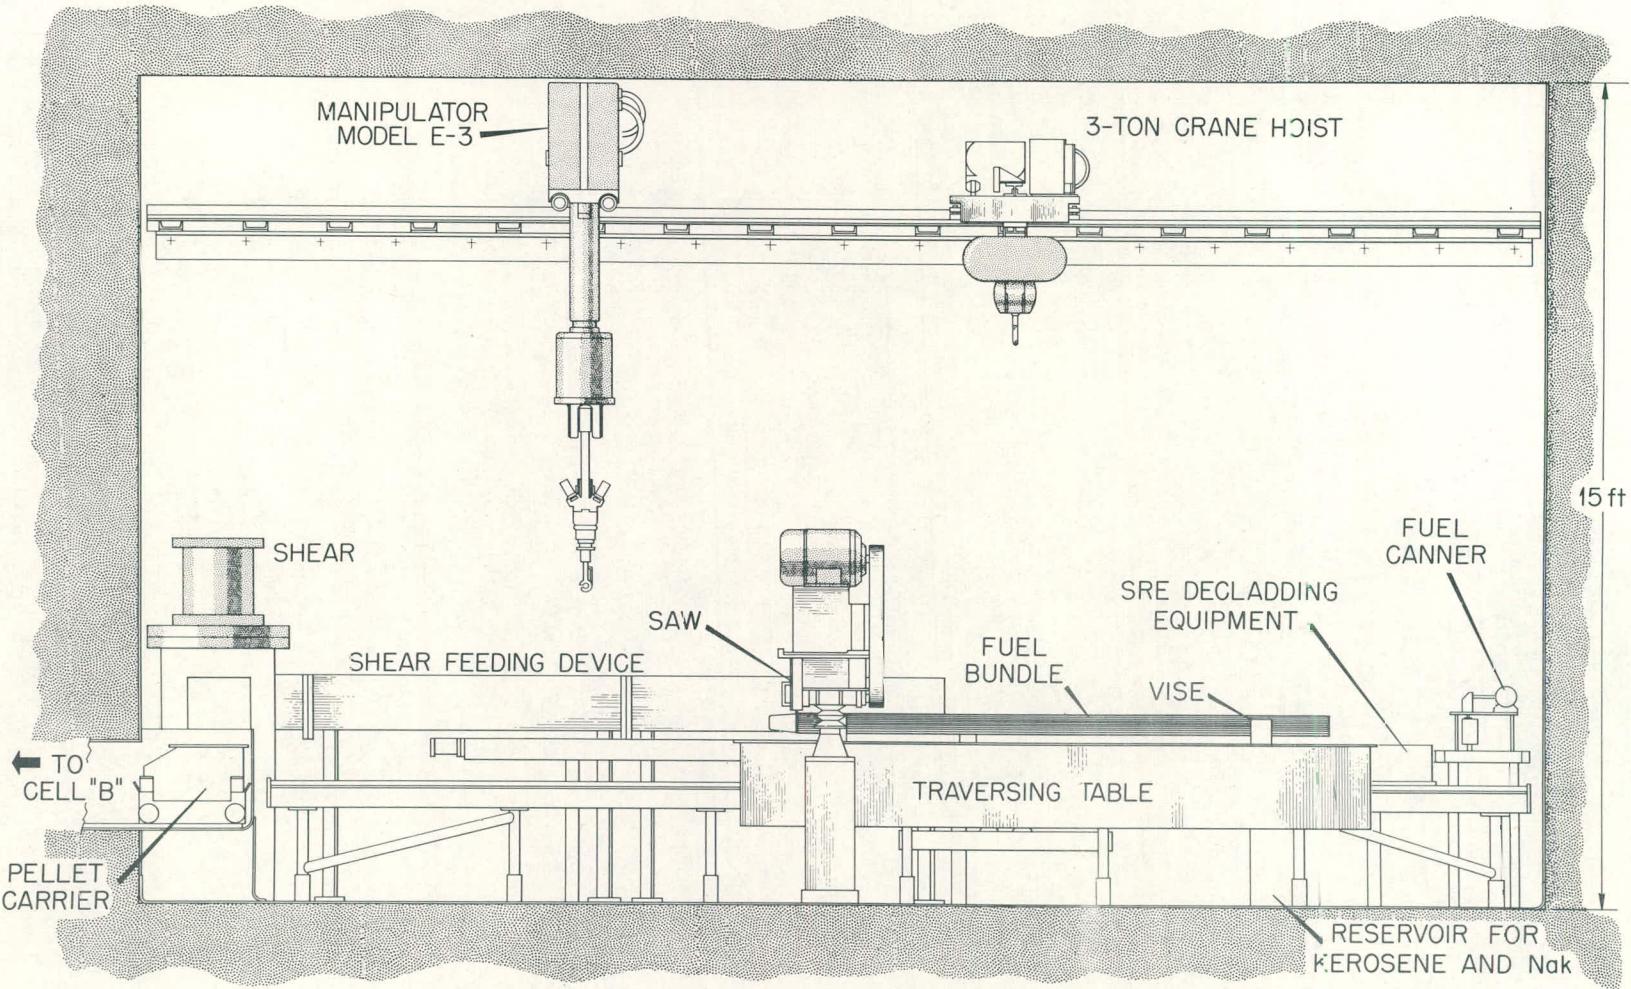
Proposed Installation in Segmenting Facility - Bldg. 3026 Front Elevation - Cell "A" (Dismantling and Shearing).
